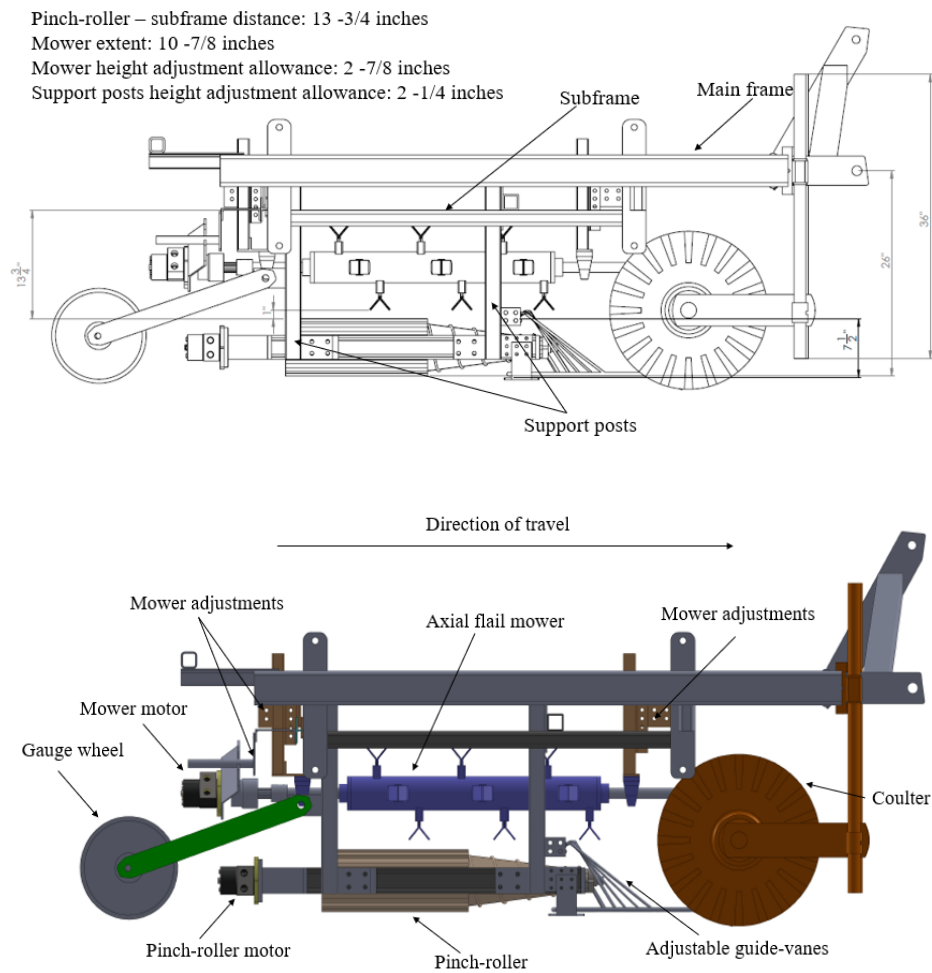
Improved one-row prototype (drawing above; design below) harvesting aid with an axial mower and Y-shaped blades along with mower and guide-vane adjustments (all dimensions in inches)
